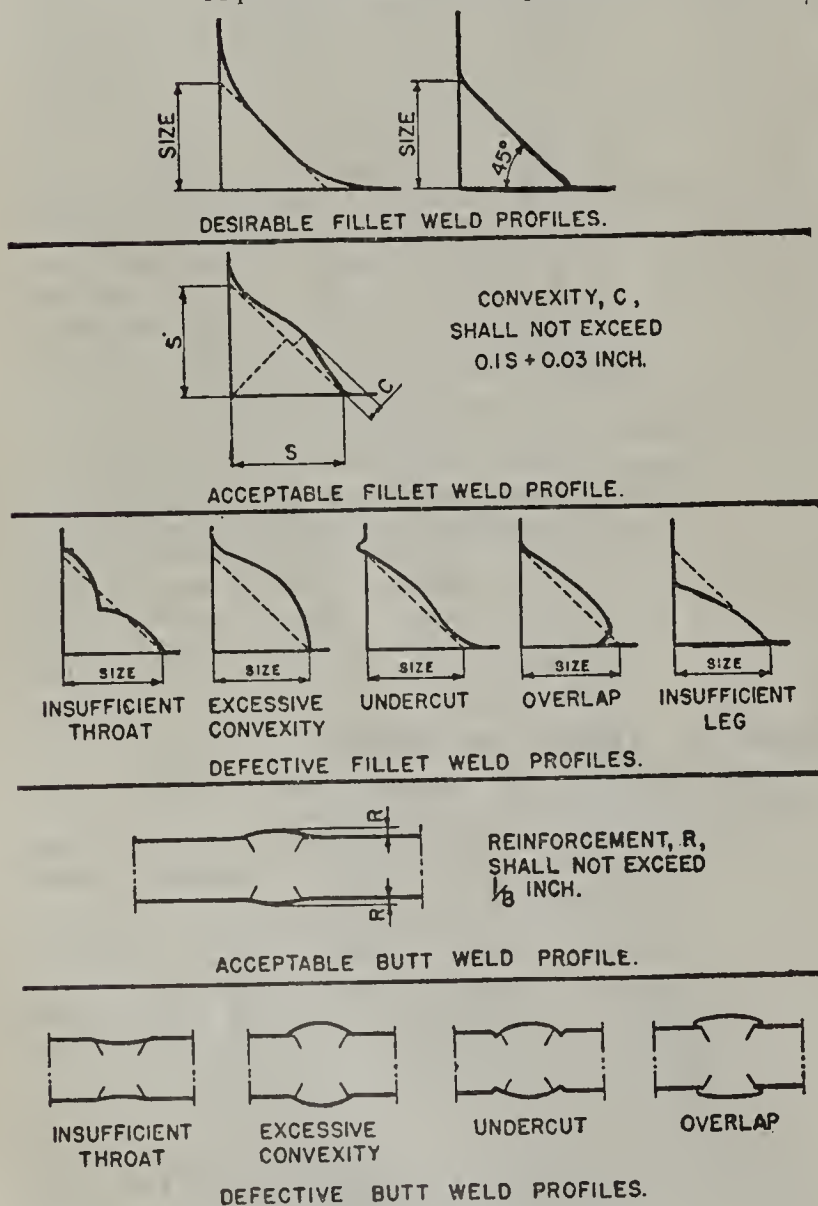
Acceptable and Defective Weld Profiles
